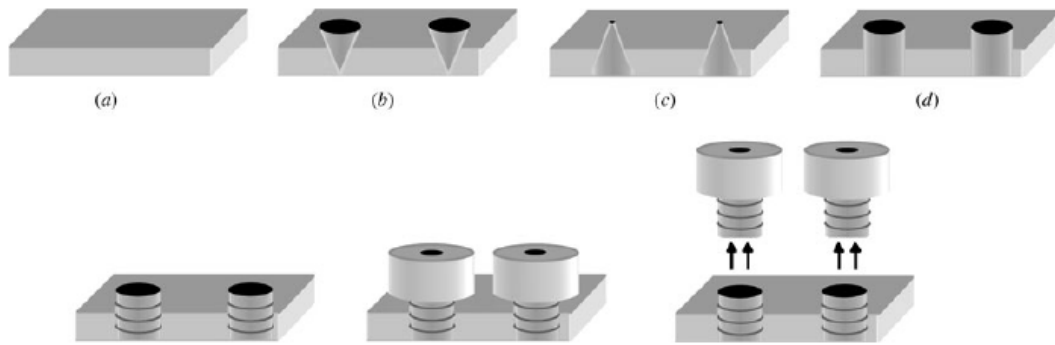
Schematics steps of creating the threaded interconnects and molding the threaded plugs [8]
